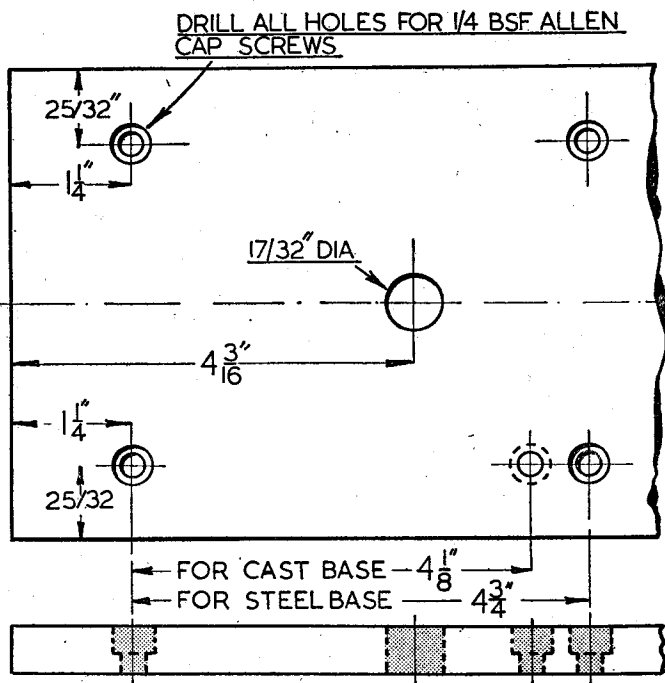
Drilling centres on the baseplate for the raising blocks and clamp bolt
